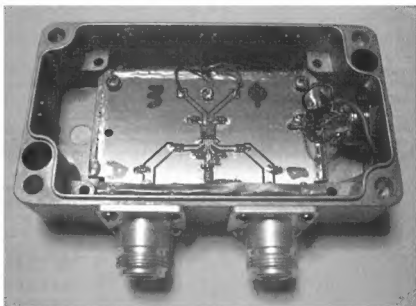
The AD8302 module. The Analog Devices data sheet should be consulted when using the AD8302 as circuit board layout is important for best performance of the device. Double sided circuit board was used, and small 0805 and 0603 surface mount components were used.
